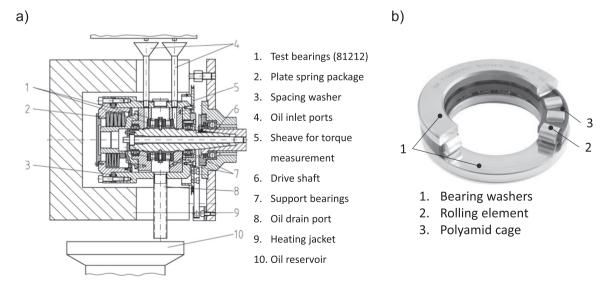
Test rig: A) FE8 test rig with test bearings of type 81212 according to [12]. B) cylinder roller thrust bearing 81212.
